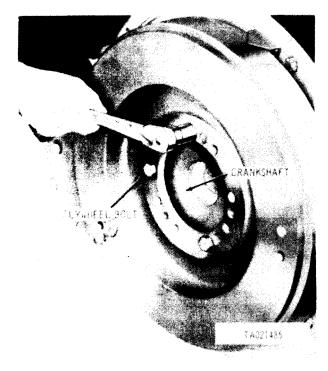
Installing flywheel and transmission drive spur gear on crankshaft.
